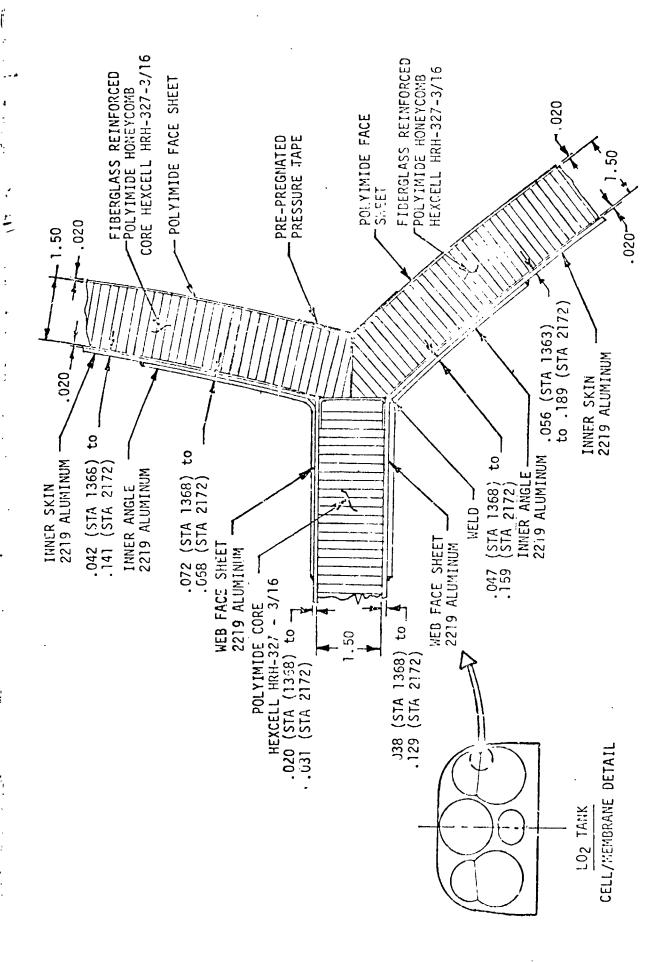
For the LOT tank, honeycomb wall duals as insulation and for tank wall stabilization
